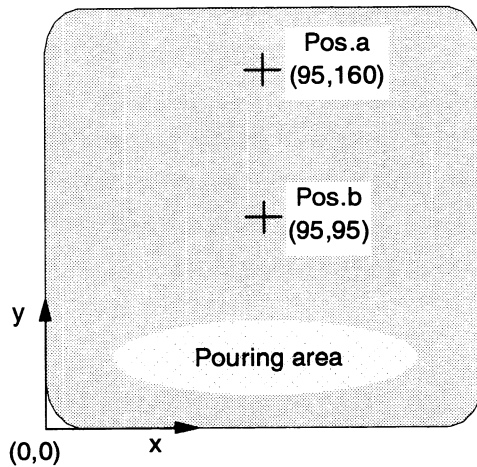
Position of sampling of cast samples. The inner dimensions of the mould is 195 cm x195 cm
